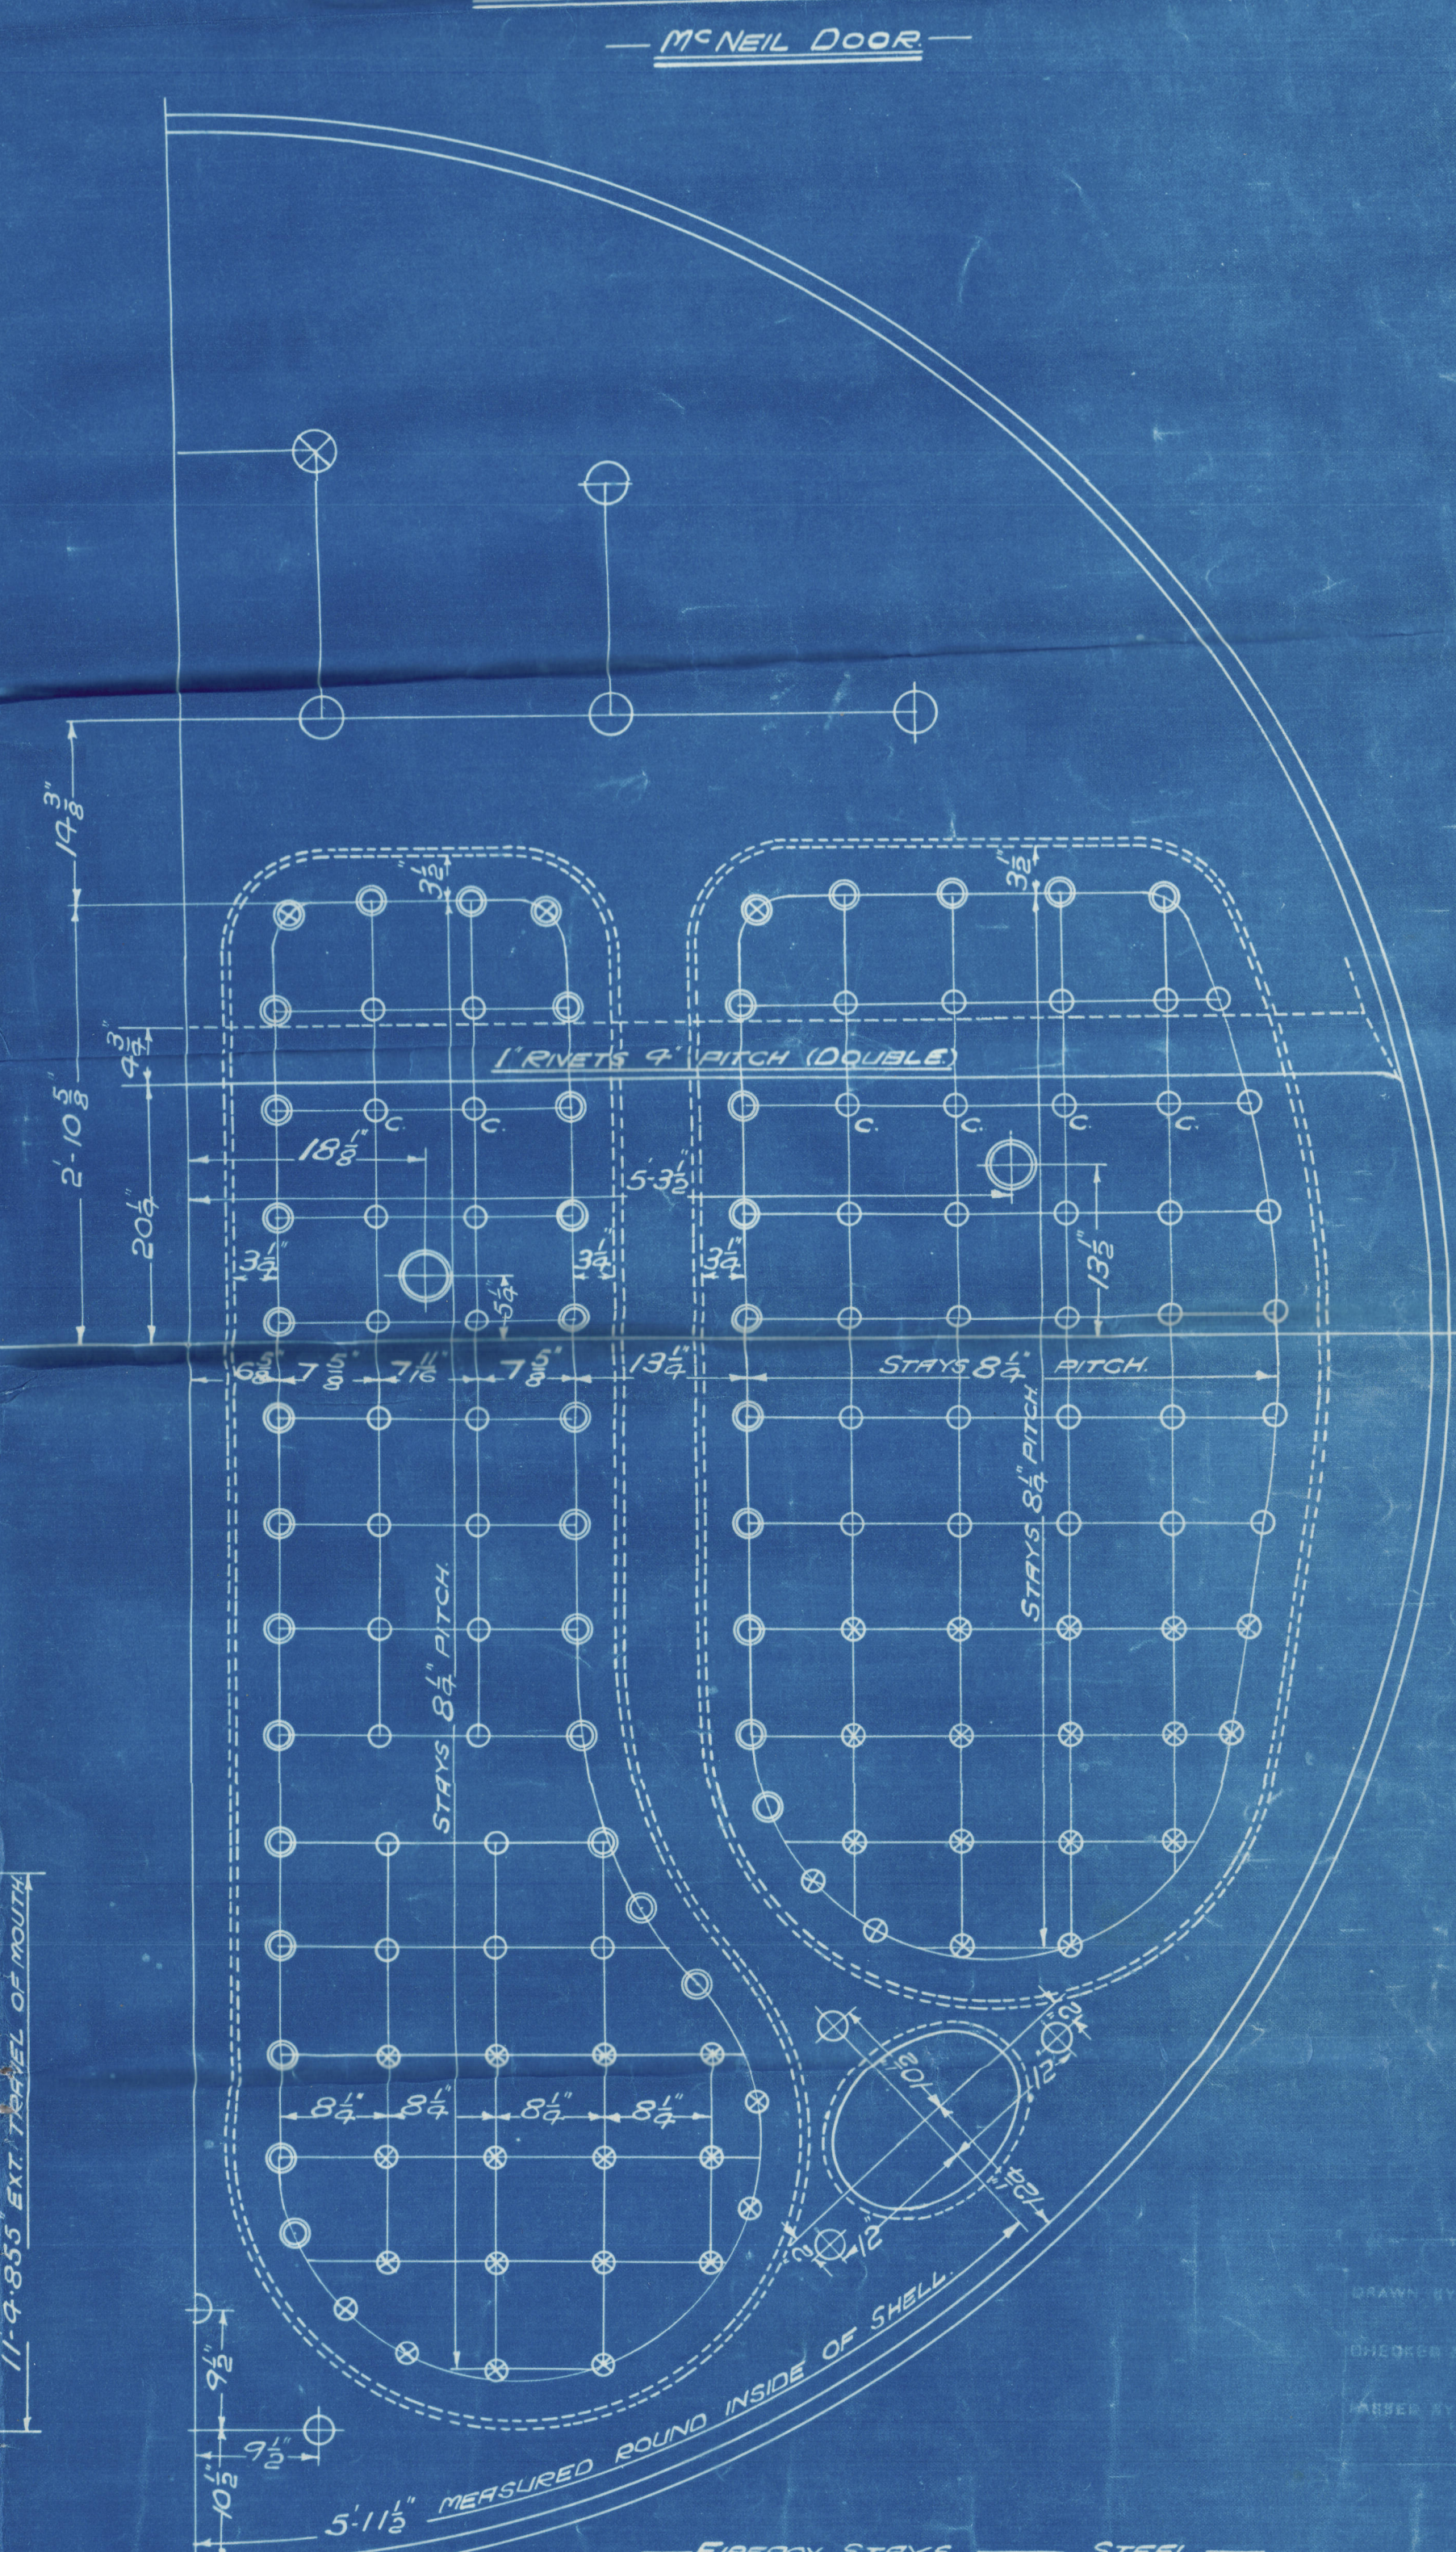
/2" THICK RIVET HOLES 1 1/8" DIA
